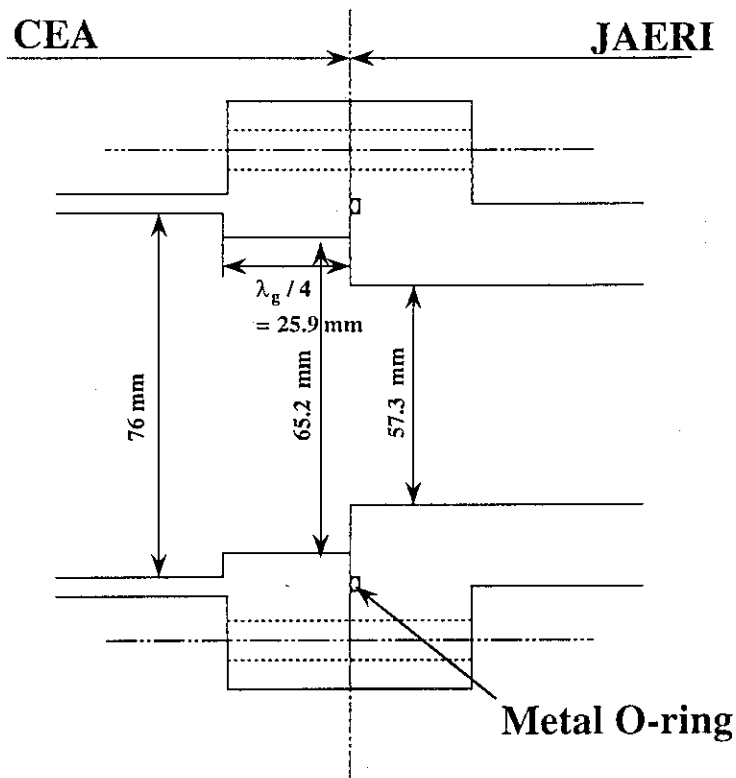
Schematic drawing of the connected flanges showing the step transformer.
